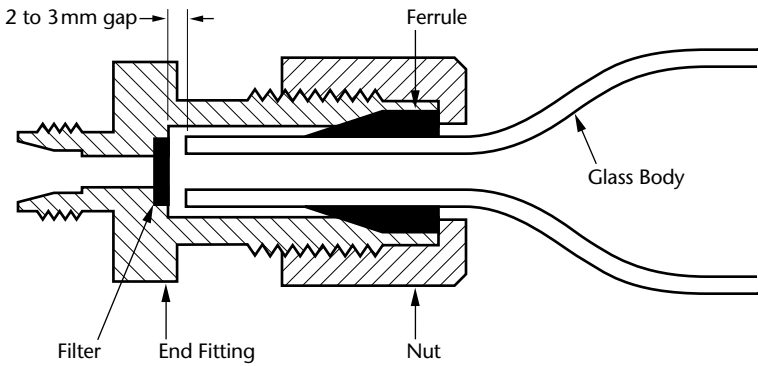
End Fitting Assembly Models SG6190 and SG6191 Purifiers
